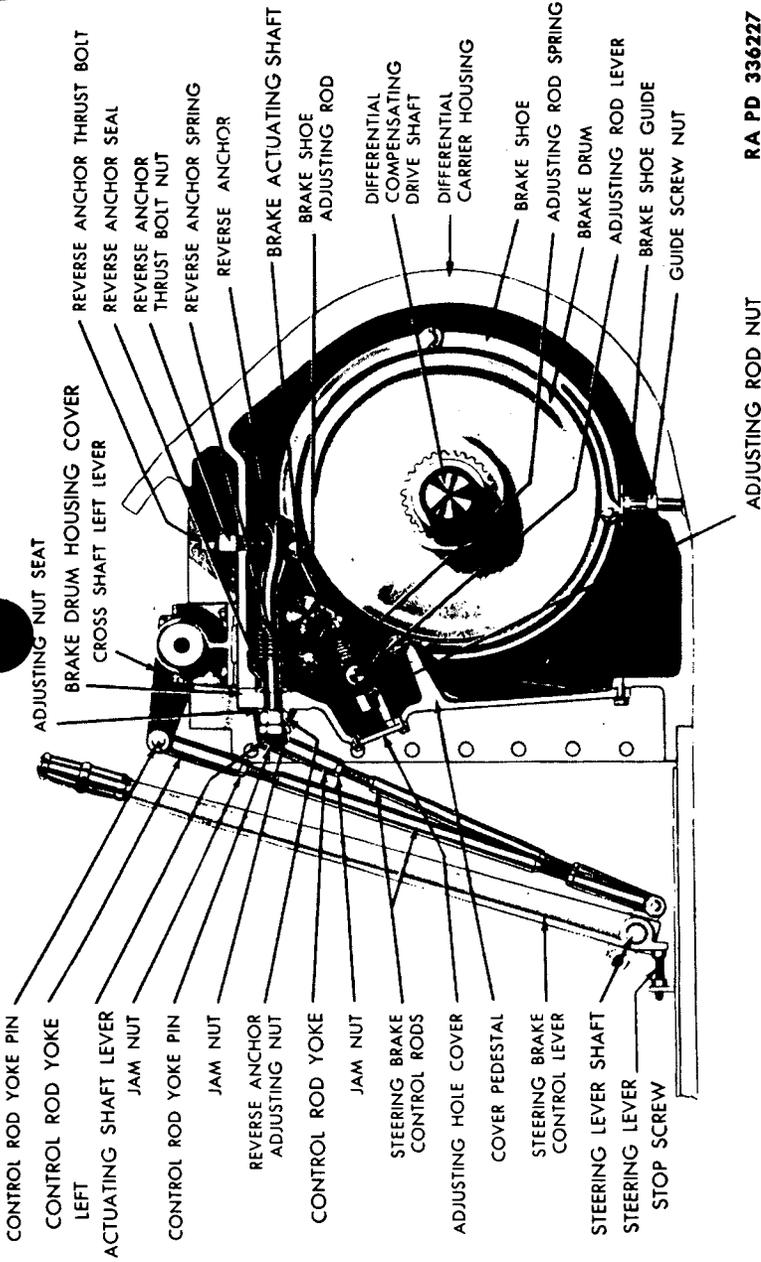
Cross-sectional View of Double-anchor Steering Brake Mechanism
